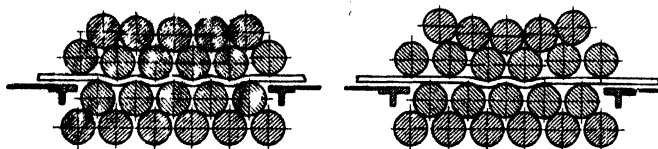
Multiple-roller sheet levelling machine, backed-up type — diagrammatic.
